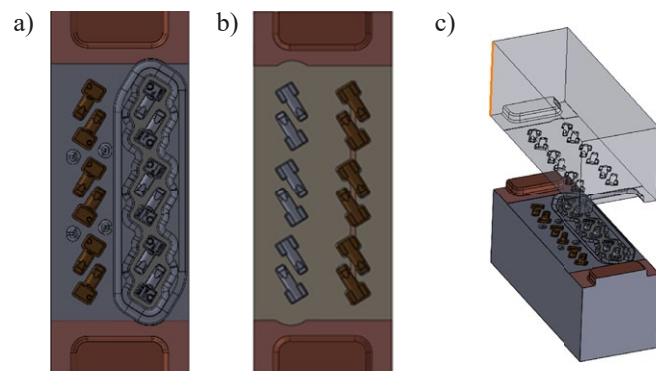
Forging tool construction in the arrangement: 6 elements rotated by 35° with folding 40×90 mm: a) lower die, b) upper die, c) 3D view
